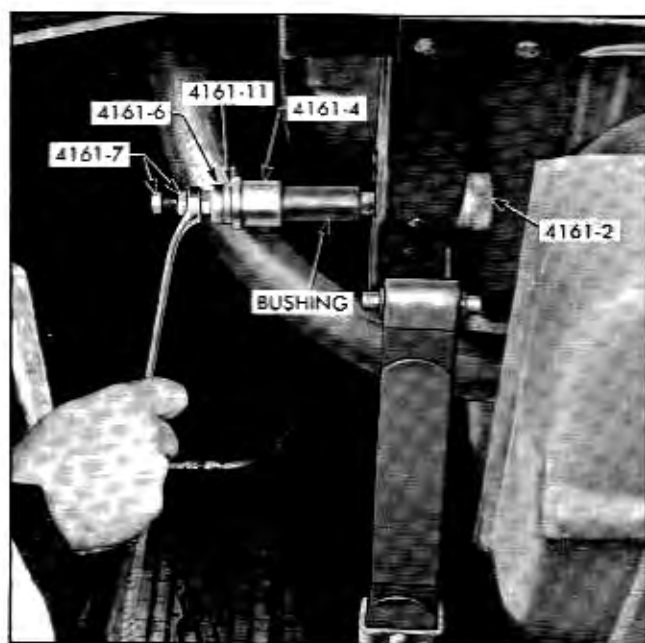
Bushing Replacer Tool J-4161-A Positioned for Installation of Rear Bushing
